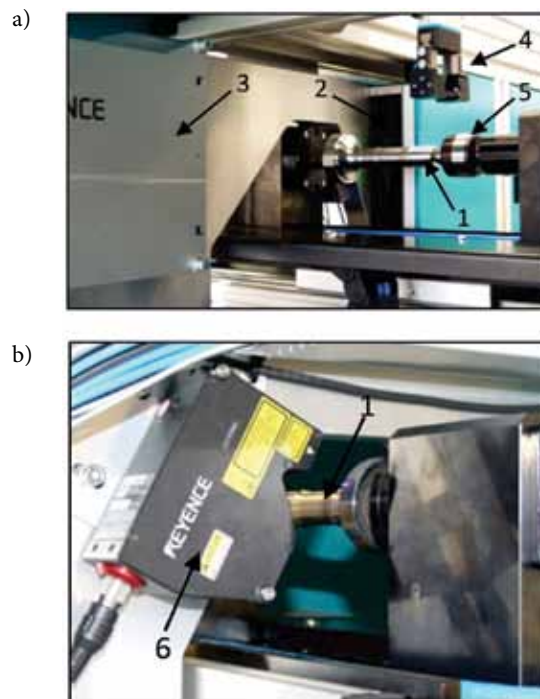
Measuring module for inspecting the side surface of the shaft: a) front view, b) rear view; 1 – shaft, 2 – transmission head of the optical micrometre, 3 – receiving head of the optical micrometre, 4 – gripper, 5 – claw gripper, 6 – 2D laser head
